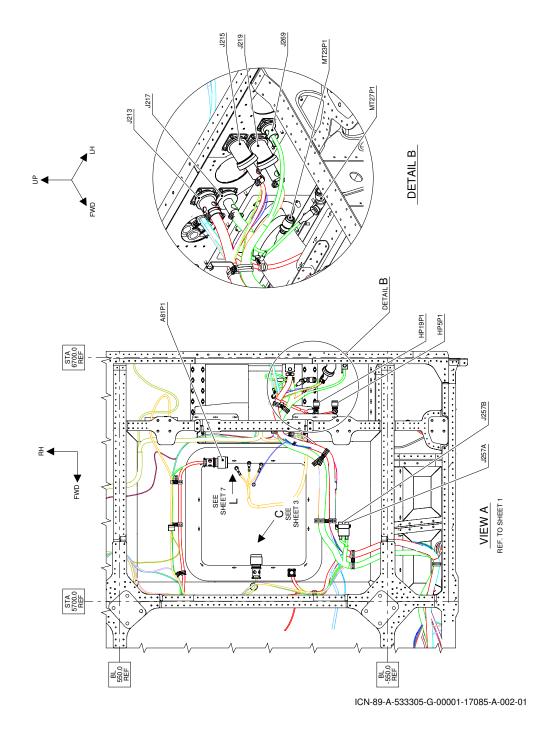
(Sheet 2 of 7) Left BL 550 aft longeron - Electrical parts
